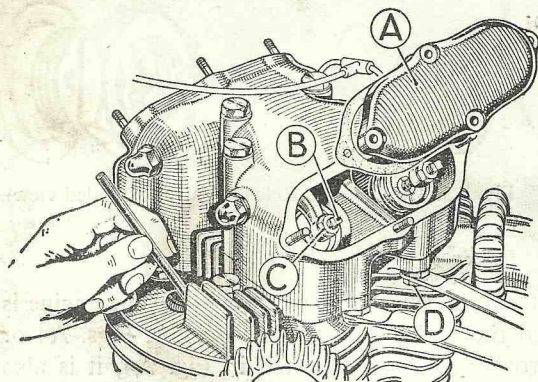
Valve Clearance Adjustment and Ignition Setting.
